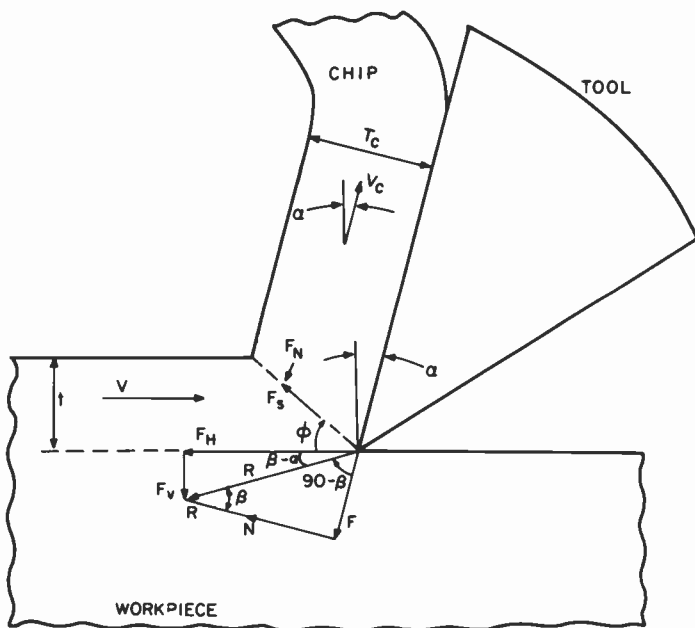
Geometry of thin-shear-plane model for metal cutting.
